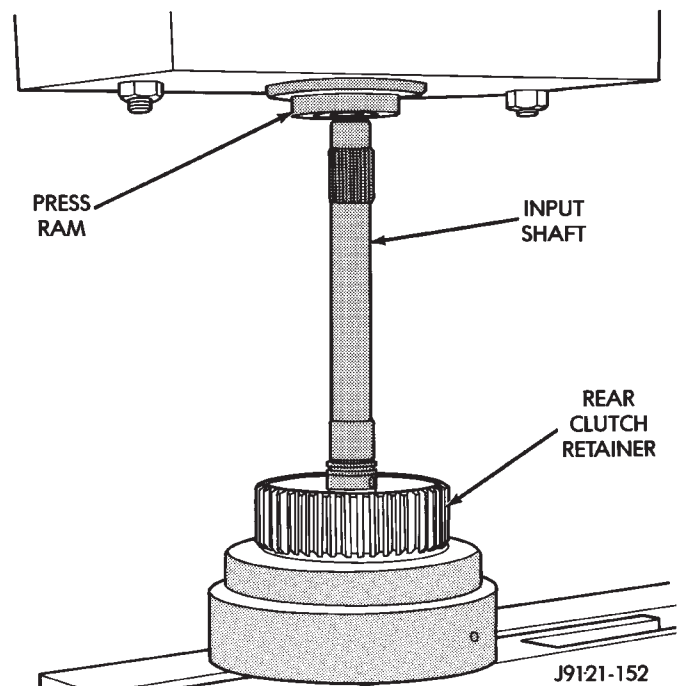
Pressing Input Shaft Into Rear Clutch Retainer
